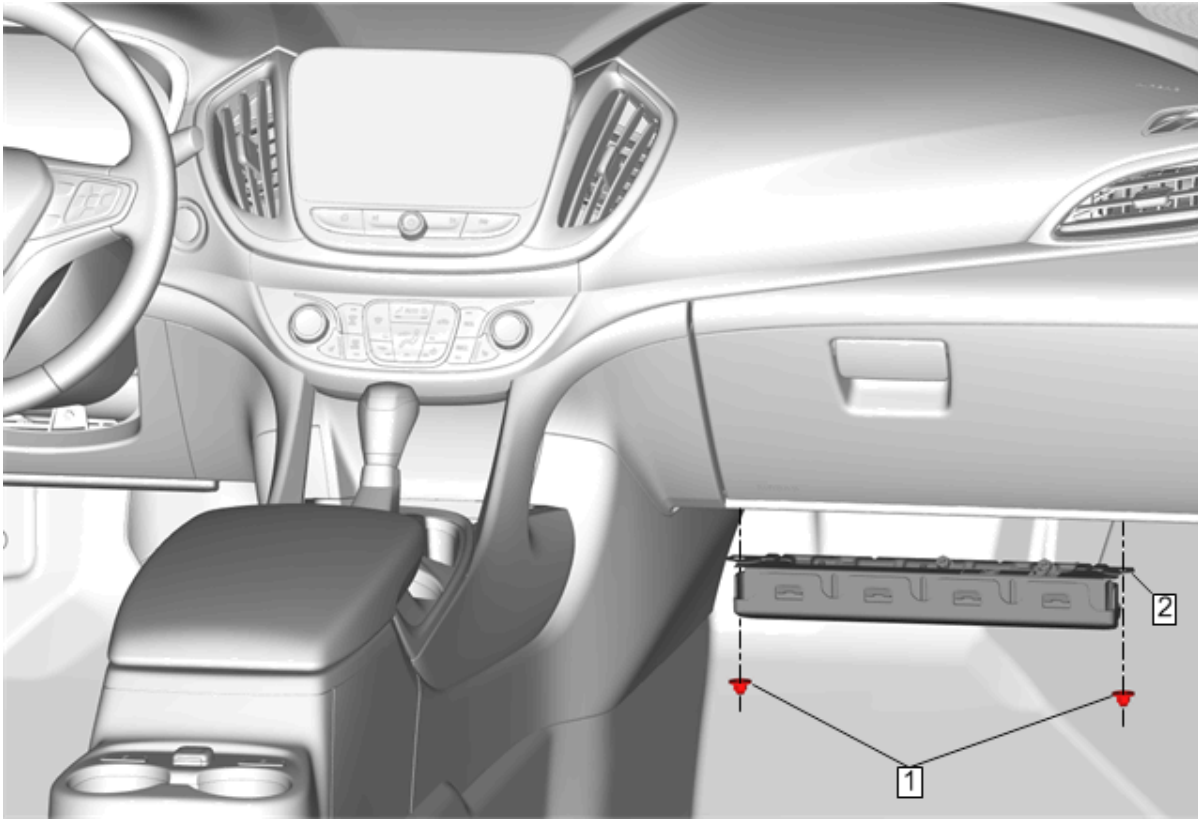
Instrument Panel Lower Airbag - Passenger Side
